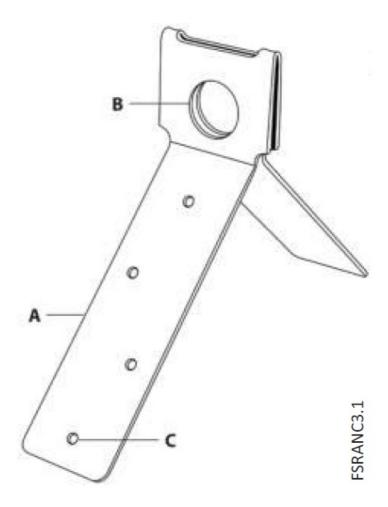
Roof Anchors for Fall Arrest with VLL or SRD
